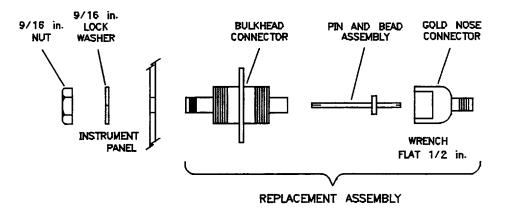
Exploded Diagram of a 2.4 mm Connector
